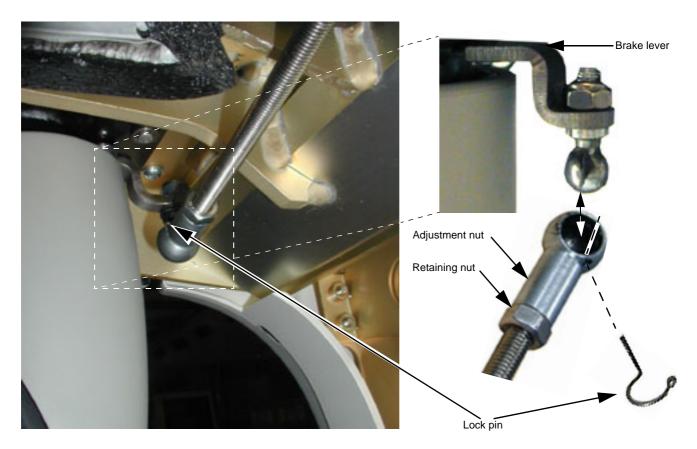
Front Caster Brake Arm and Ball Joint Parts
